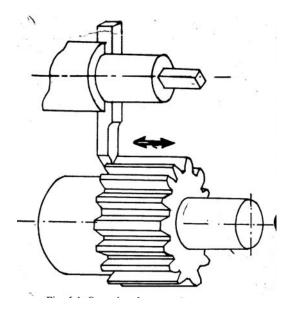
Gear teeth cutting in ordinary shaping machine.
